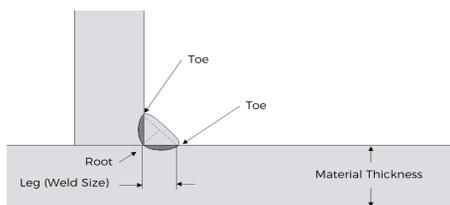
Schematic of a T-joint sample showing the location of weld toes.
